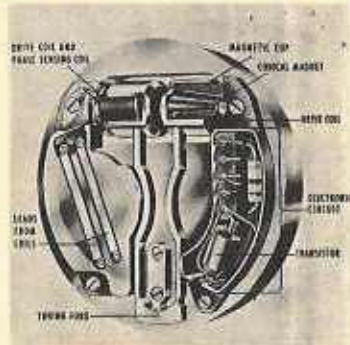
This is the basic mechanism of "Accutron." Tiny striped cylinder at 3 o'clock position is the resistor.
